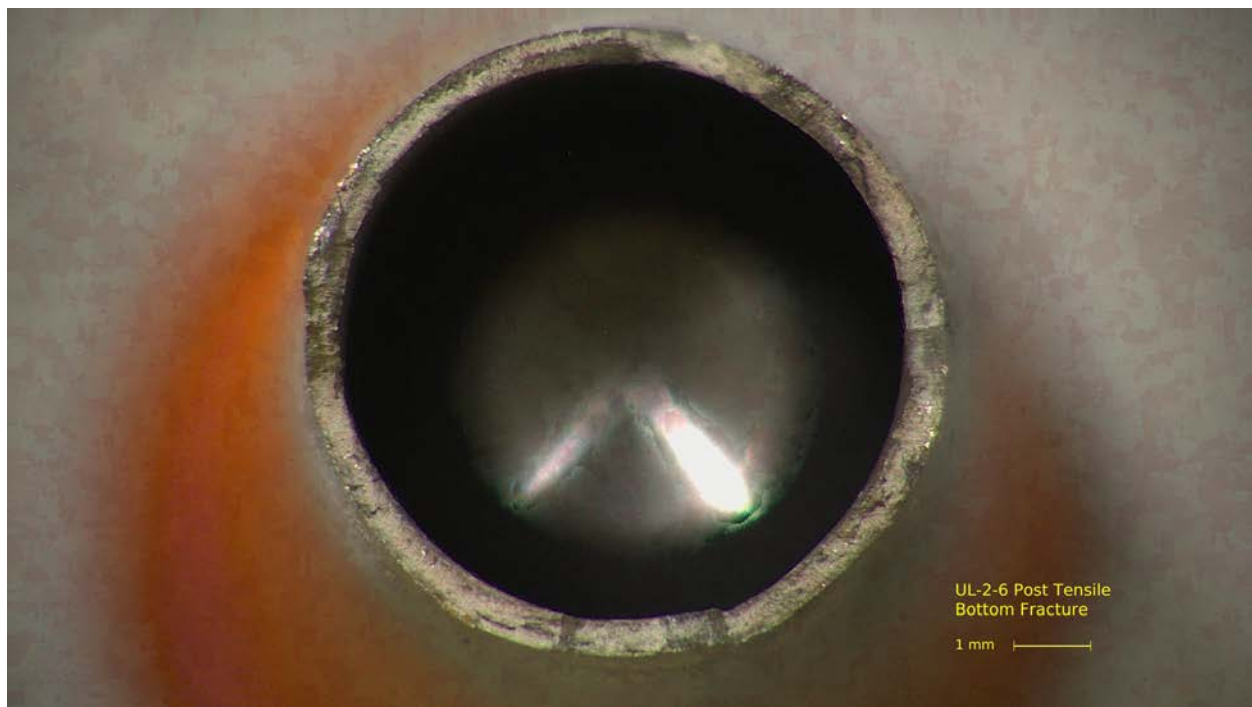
Post-Tensile Image Bottom Fracture for UL-2-6
